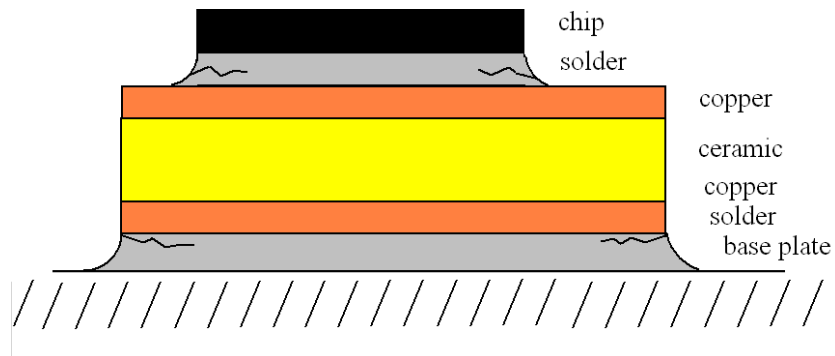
Cracks in the solder layer initiate on the edges and propagate towards the center of the solder.
